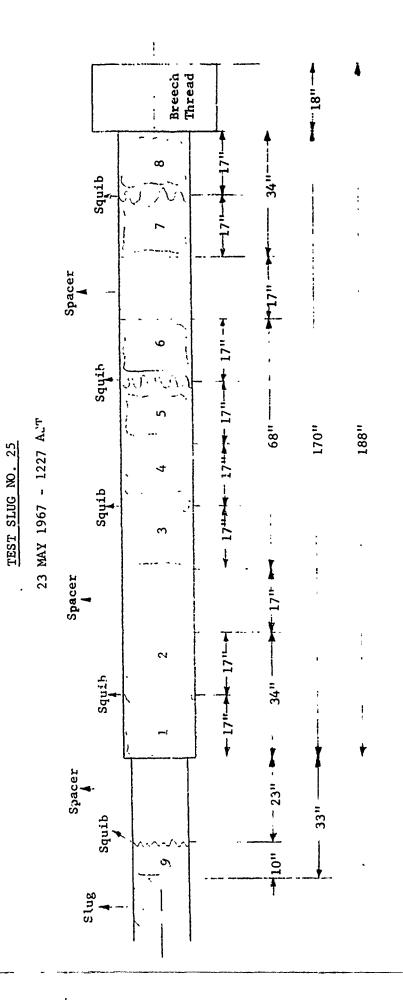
METAL TEST SLUG TEST SLUG No. 25
